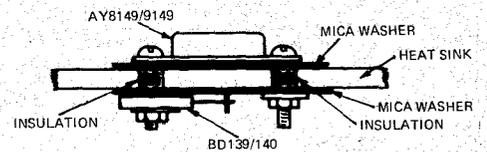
Method of assembly of power and BD139-140 transistors to the heatsink.
